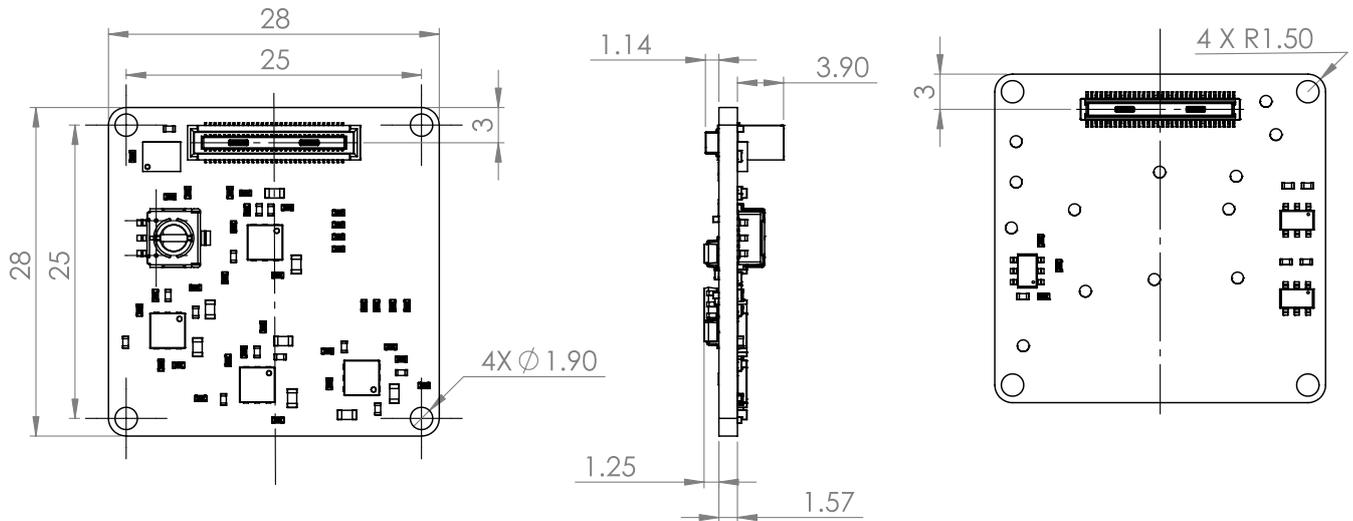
Technical Drawing of FSA-FTx/BC-V1
